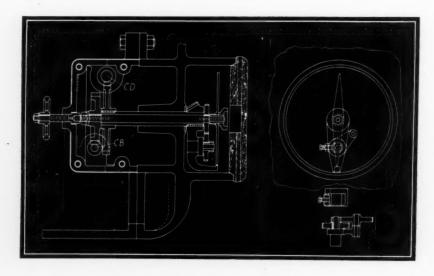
Feed clutch on the carriage of large gun lathe is between the feed change gears and the rotating nuts
